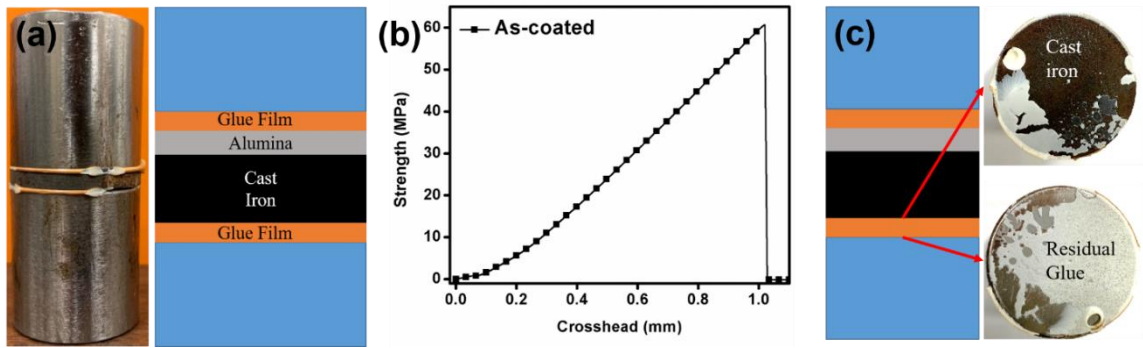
(a) Illustration of the adhesive tensile test; (b) A typical tensile curves of single-side coated cast iron sample; (c) Fracture surfaces after tensile test showing adhesive failure on the uncoated side.
